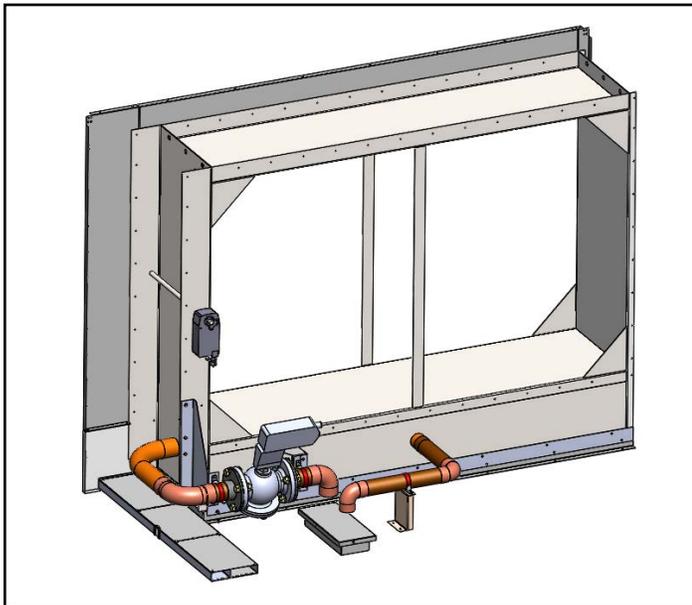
B-Cabinet Steam Heat Section (Valve and Factory Piping)
